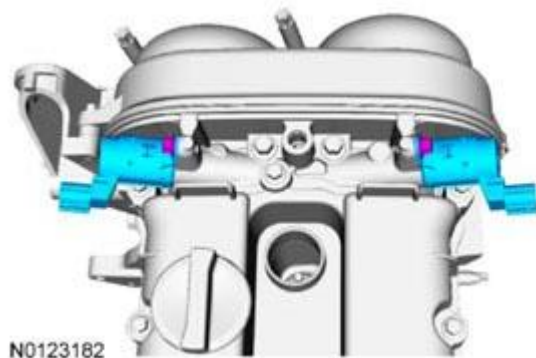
Identifying Variable Camshaft Timing (VCT) Oil Control Solenoids And Bolts
